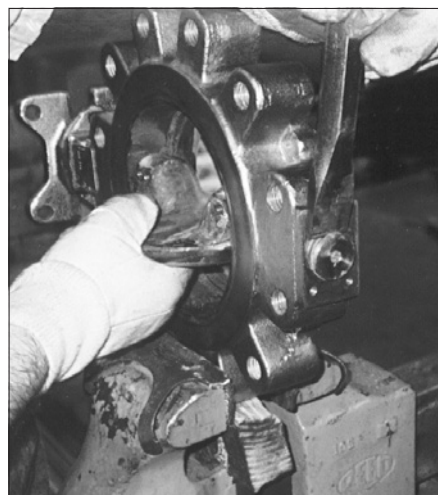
Shows the proper placement of the disc locating shoulder and the body bottom surface.
